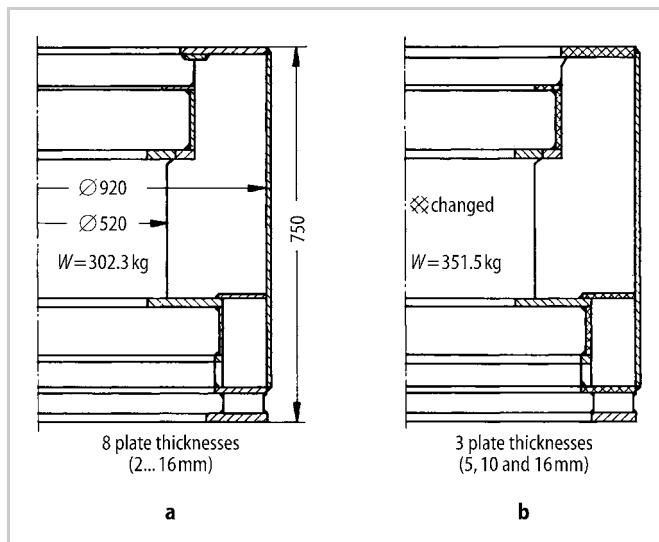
Electric motor housing of welded construction (Siemens): a current design; b proposed design
